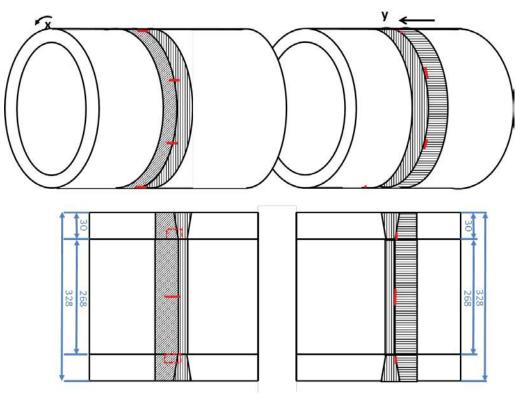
Scheme of the test specimens with notches across (left) and along (right) the weld.
